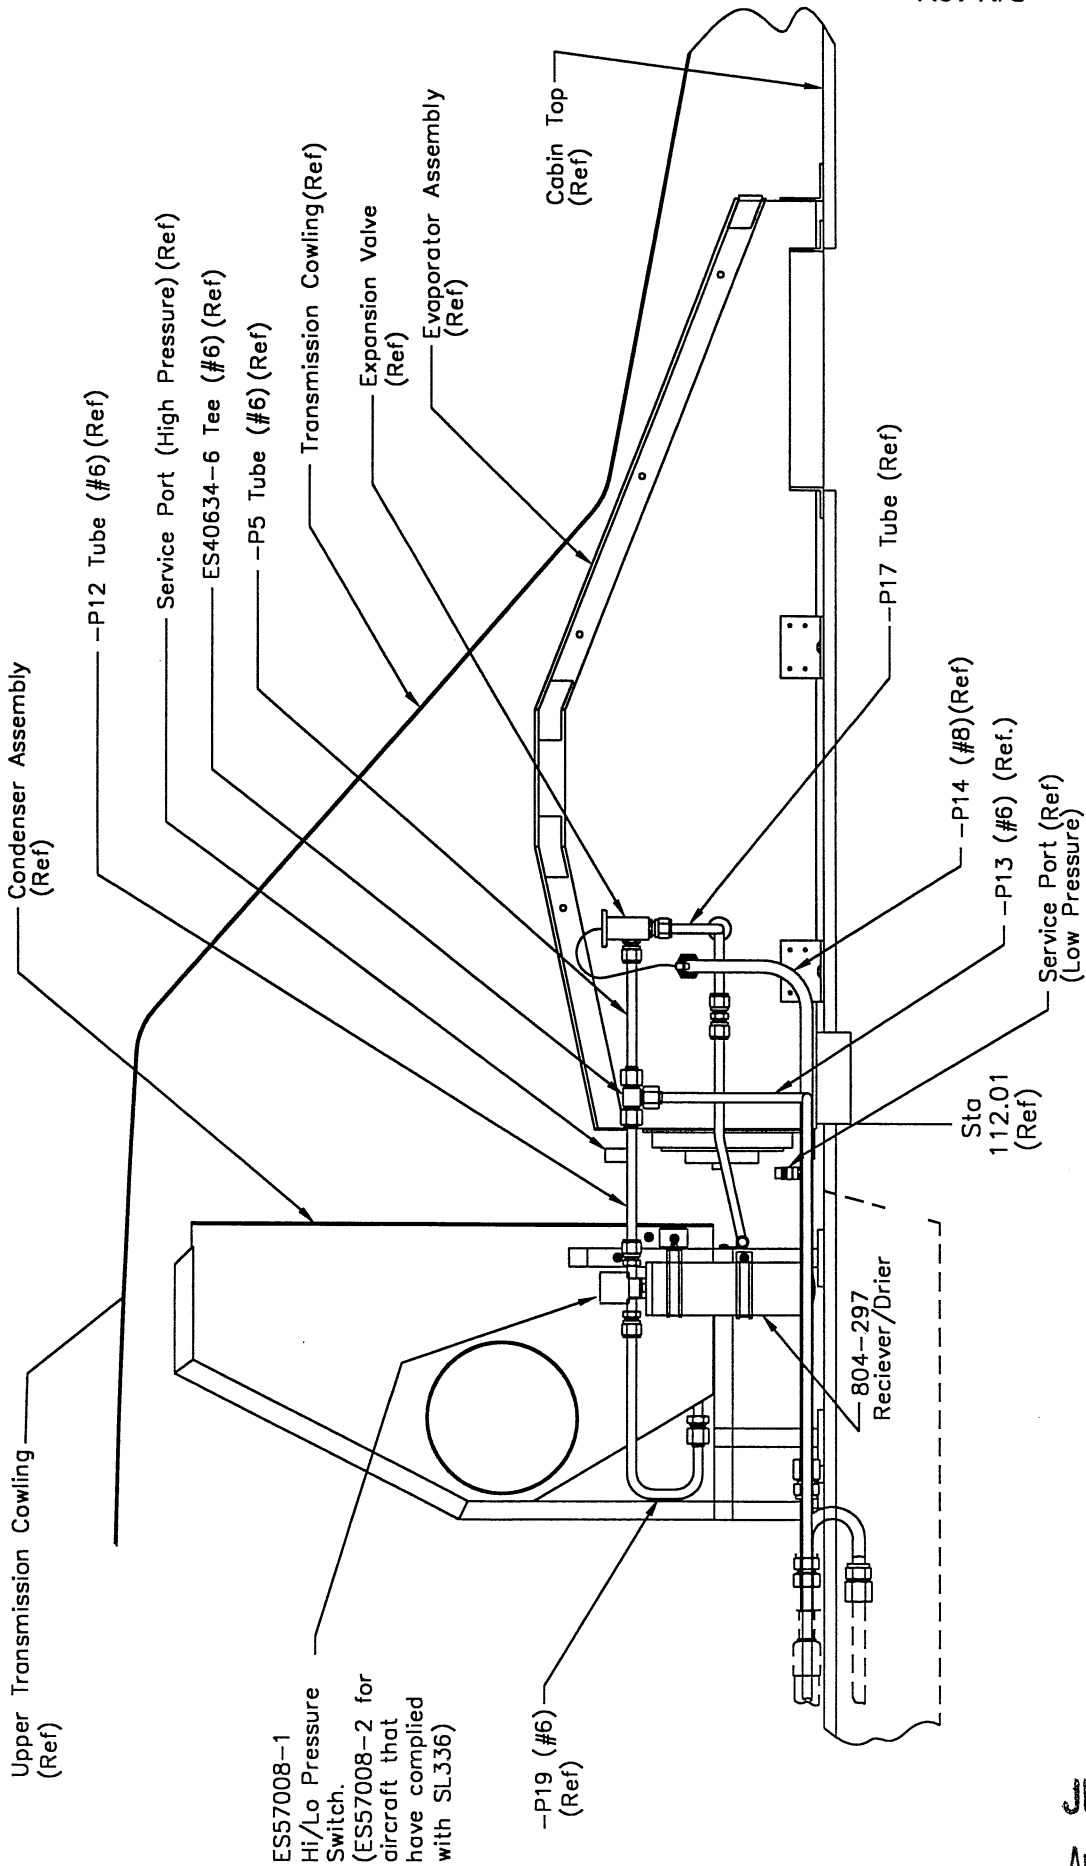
, Bell 412 Air Conditioner Cabin Roof General Arrangement Drawing
